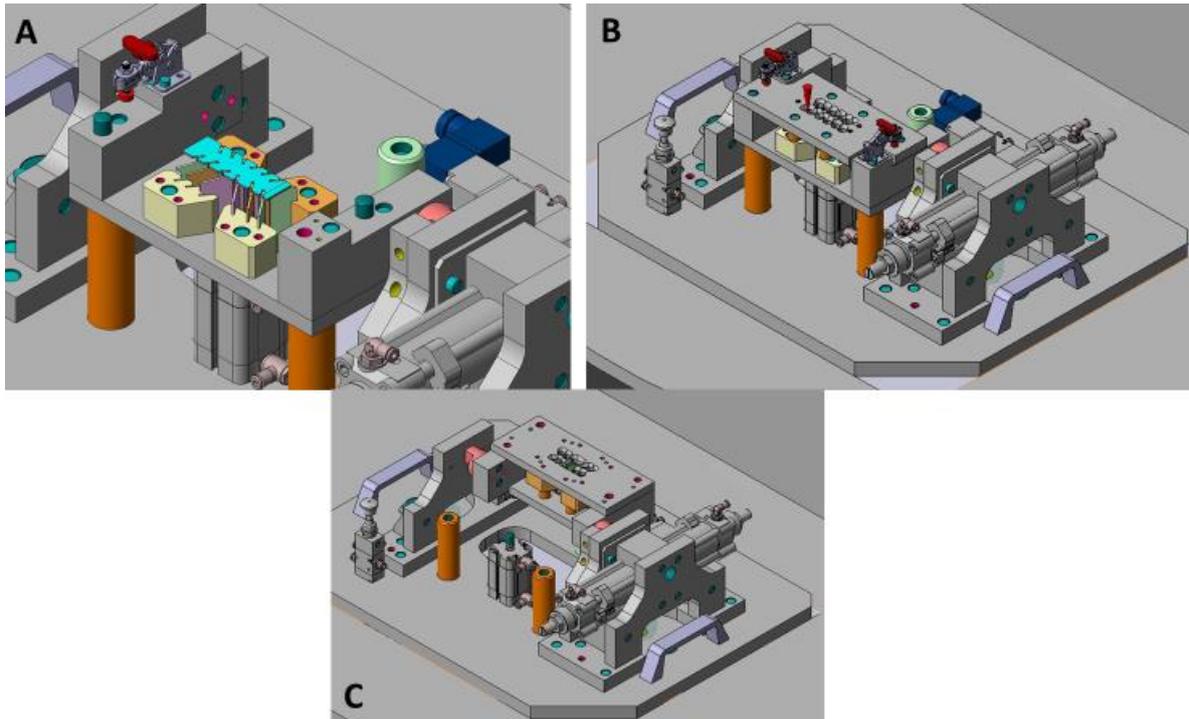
Sequence of operations required for welding of Stage 2: (A) positioning of the single components, (B) closing of the mask with the cover and securing with the clamps, (C) rotation of the mask (automatically done inside the welding zone) [7]
